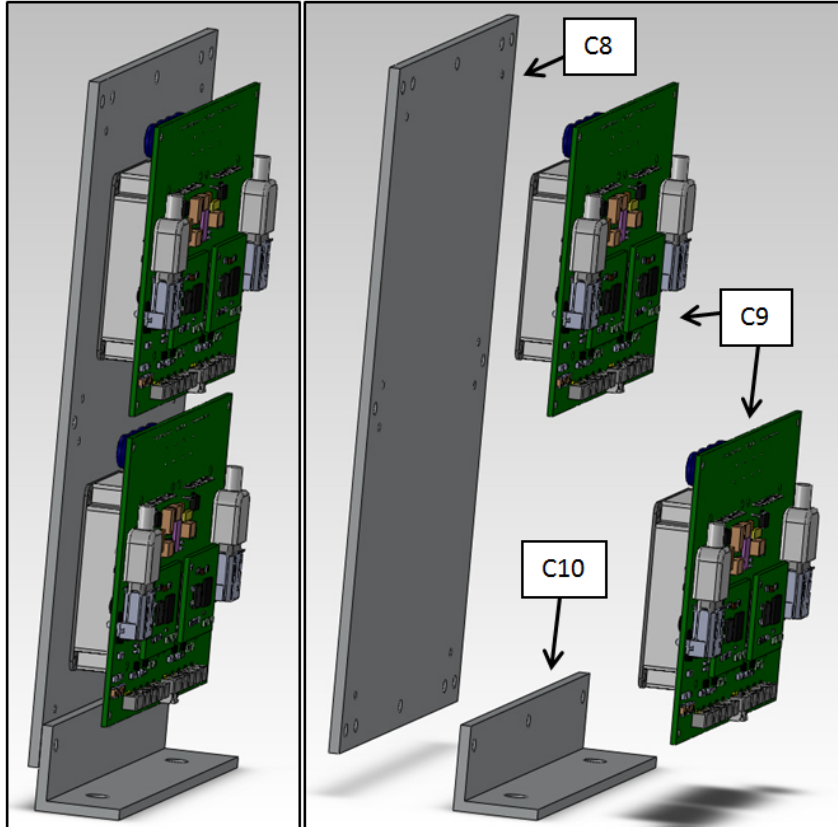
Exploded view of the ELMO submodule that handles driving the motors. Four channels for motors are available with this setup (2 per PCB), although only three channels are used to control the three motors in Trikey. One significant design flaw that was only discovered after assembly and construction is that wiring ports at the bottom of part C9 are difficult to access with fingers and tools, given the limited space there. This occurred because of a lack of knowledge about the complete electronics design during the mechanical design phase.
